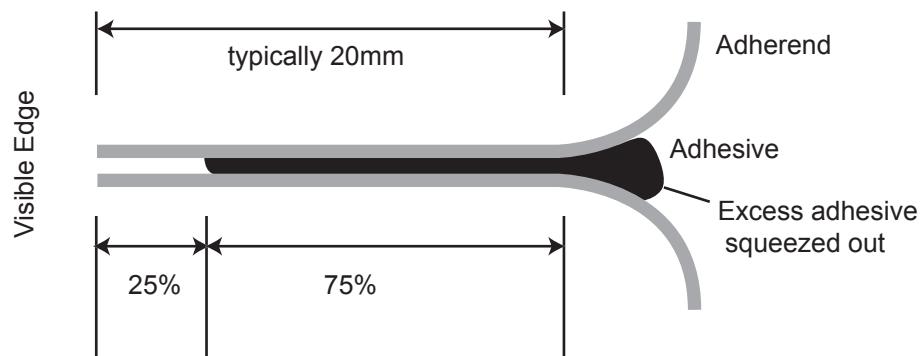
Cross-section through joint flanges showing optimum adhesive placement.
